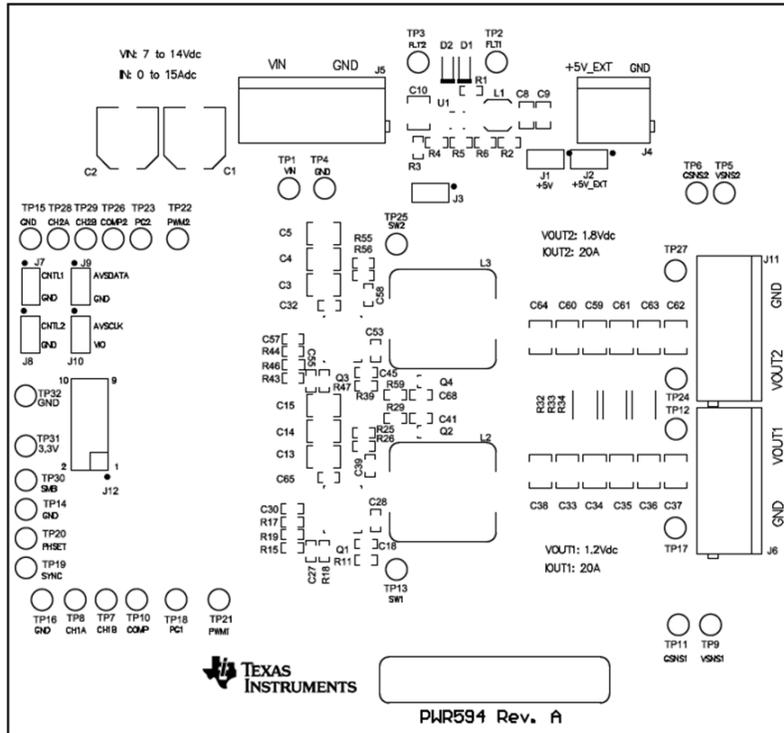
PWR594 EVM Top Layer Assembly Drawing (Top View)
